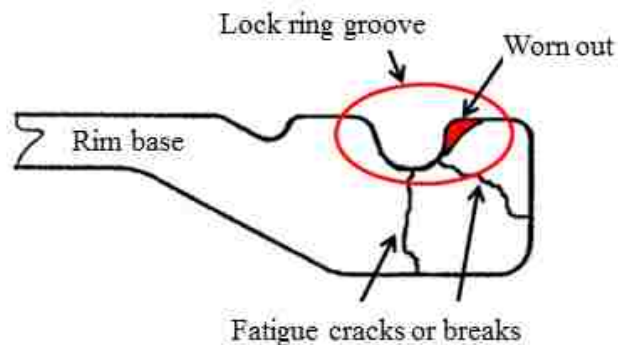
Wear and Fatigue cracks in the gutter region [5].
